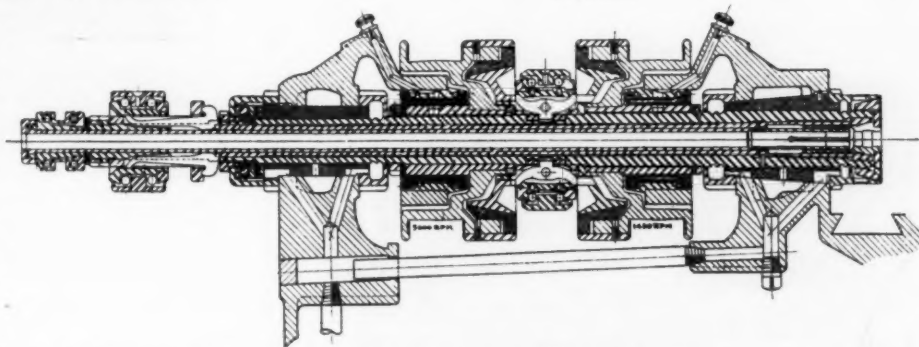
SECTION THROUGH SPINDLE OF NO. 19 AUTOMATIC SCREW MACHINE, SHOWING CONSTRUCTION SUITED TO OPERATING AT 5000 R.P.M.
